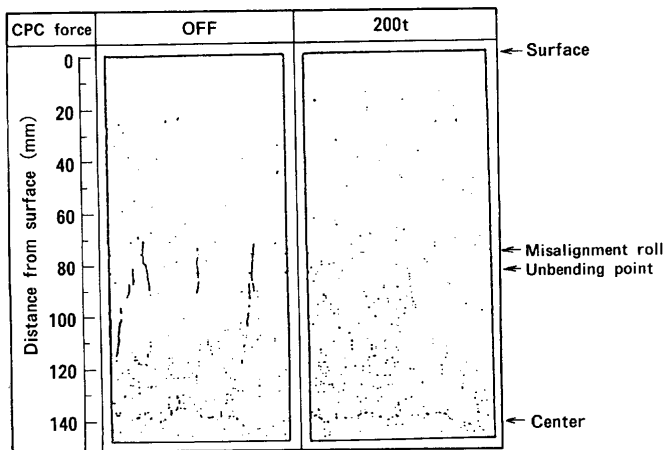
Sketch of sulfur-print for longitudinal section of misalignment roll test slab.
